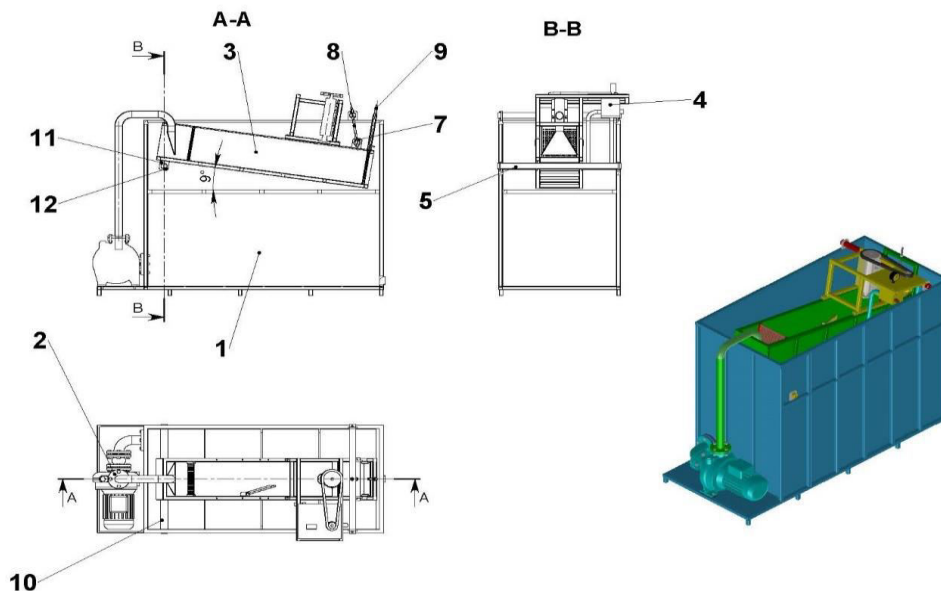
Assembly-mounting drawing and isometric view of the stand
